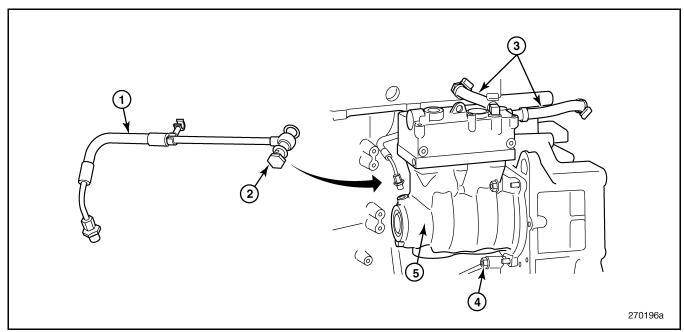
Air Compressor Coolant and Lubrication Fittings
